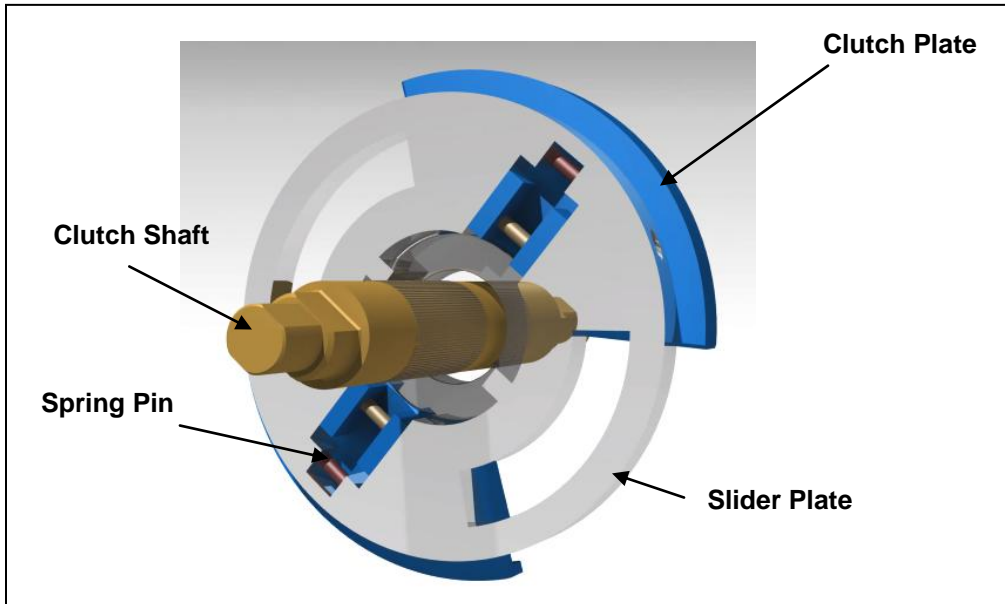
Bottom View of the Two Clutch Plates and the Slider Plate
